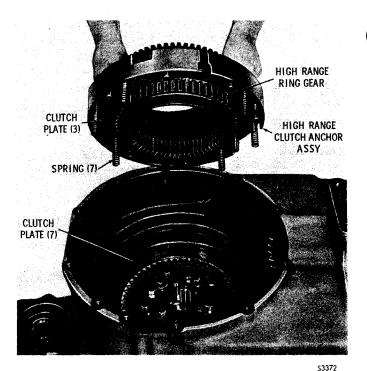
Removing high-range clutch anchor and high-range ring gear
